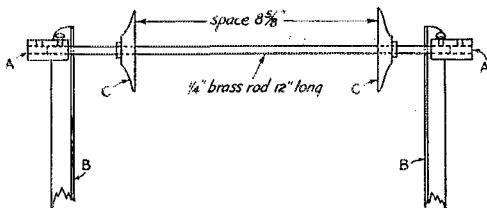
Reel for holding paper roll on typewriter carriage for continuous code copy as used by W9IBC. A — Shaft couplings for ¼-in. brass rod. B — Half-inch aluminum or brass angle. C — Old bakelite dials.
